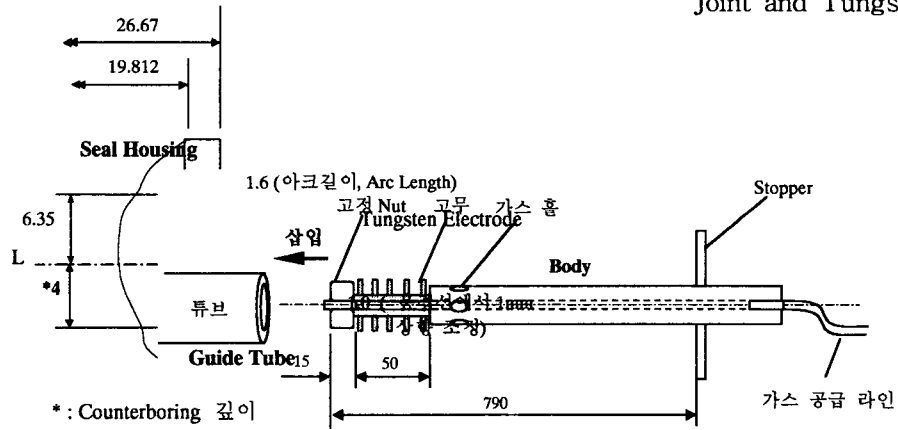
Special Designed Tool to Purge the Inside of ICI Tubes
